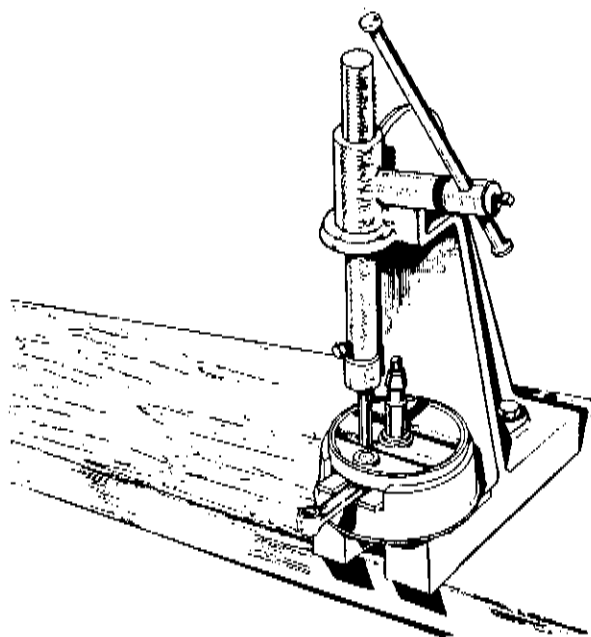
Parting the Flywheels with Service Tool 61-3206.
